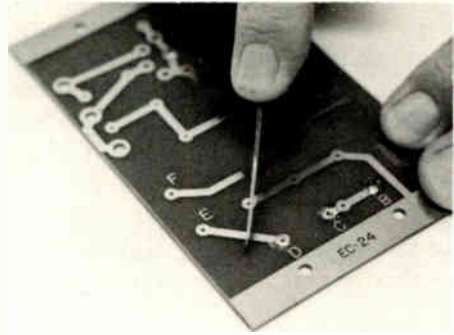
Cutting the foil to simulate a crack in the board.
